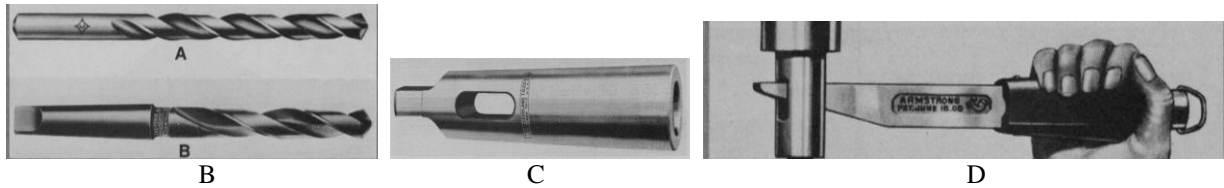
Parts of a drill (A), types of drill shank (B), sleeve or shell socket (C), drill drift (D)
